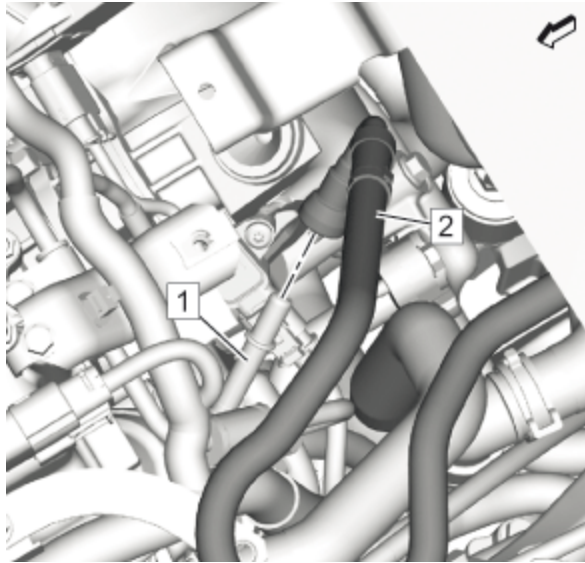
Fuel Feed Front Pipe And Fuel Injection Pump
